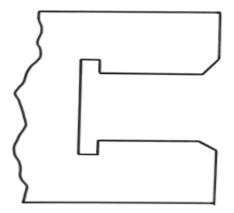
The hole for an inside thread must have sides that are parallel with the axis of rotation and a recess at the bottom of the hole to allow the chaser to fully cut the thread before coming in contact with the bottom of the hole. A rounded or at least chamfered section at the opening helps preventing a sharp edge from catching a tooth of the chaser and creating circles rather than a thread.
